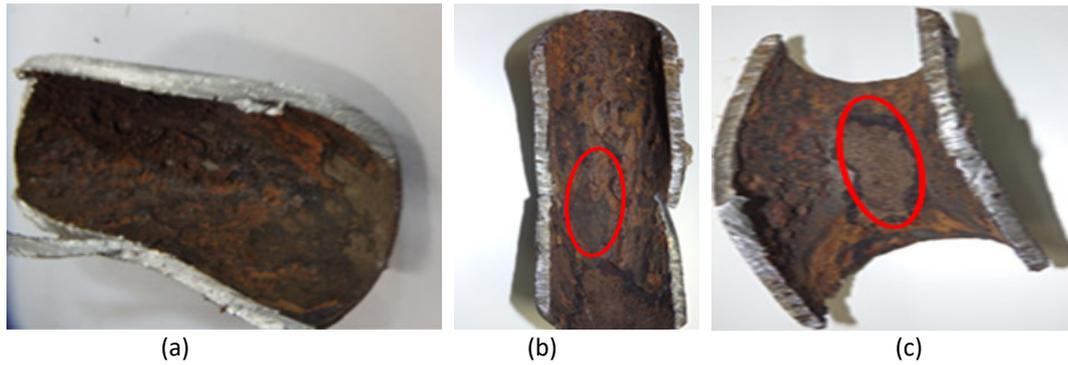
Visual inspection after cleaning of smooth bend samples (a and b) inner diameter and (c) outer diameter.
